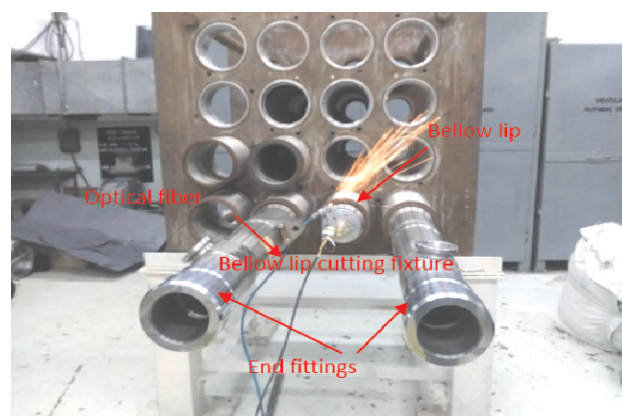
Laser cutting tool mounted for cutting of bellow lip after laser cutting of outboard end fitting.
